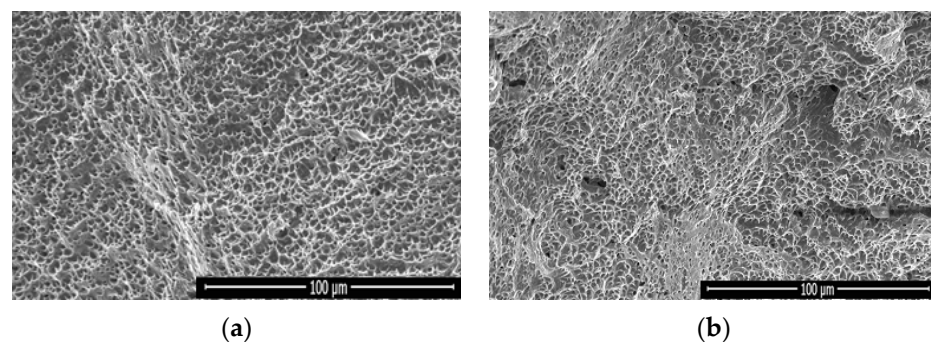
Fractograph of Austenitic stainless steel 316L impact Charpy “V” notch for (a) TIG Welded Zone ($500\times$) and (b) ATIG Welded Zone ($500\times$).
